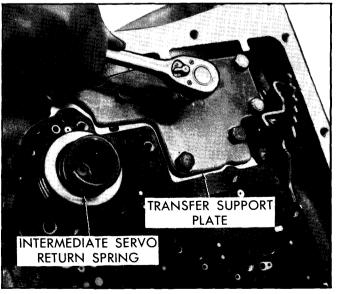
Removing Transfer Support Plate and Intermediate Servo Return Spring
